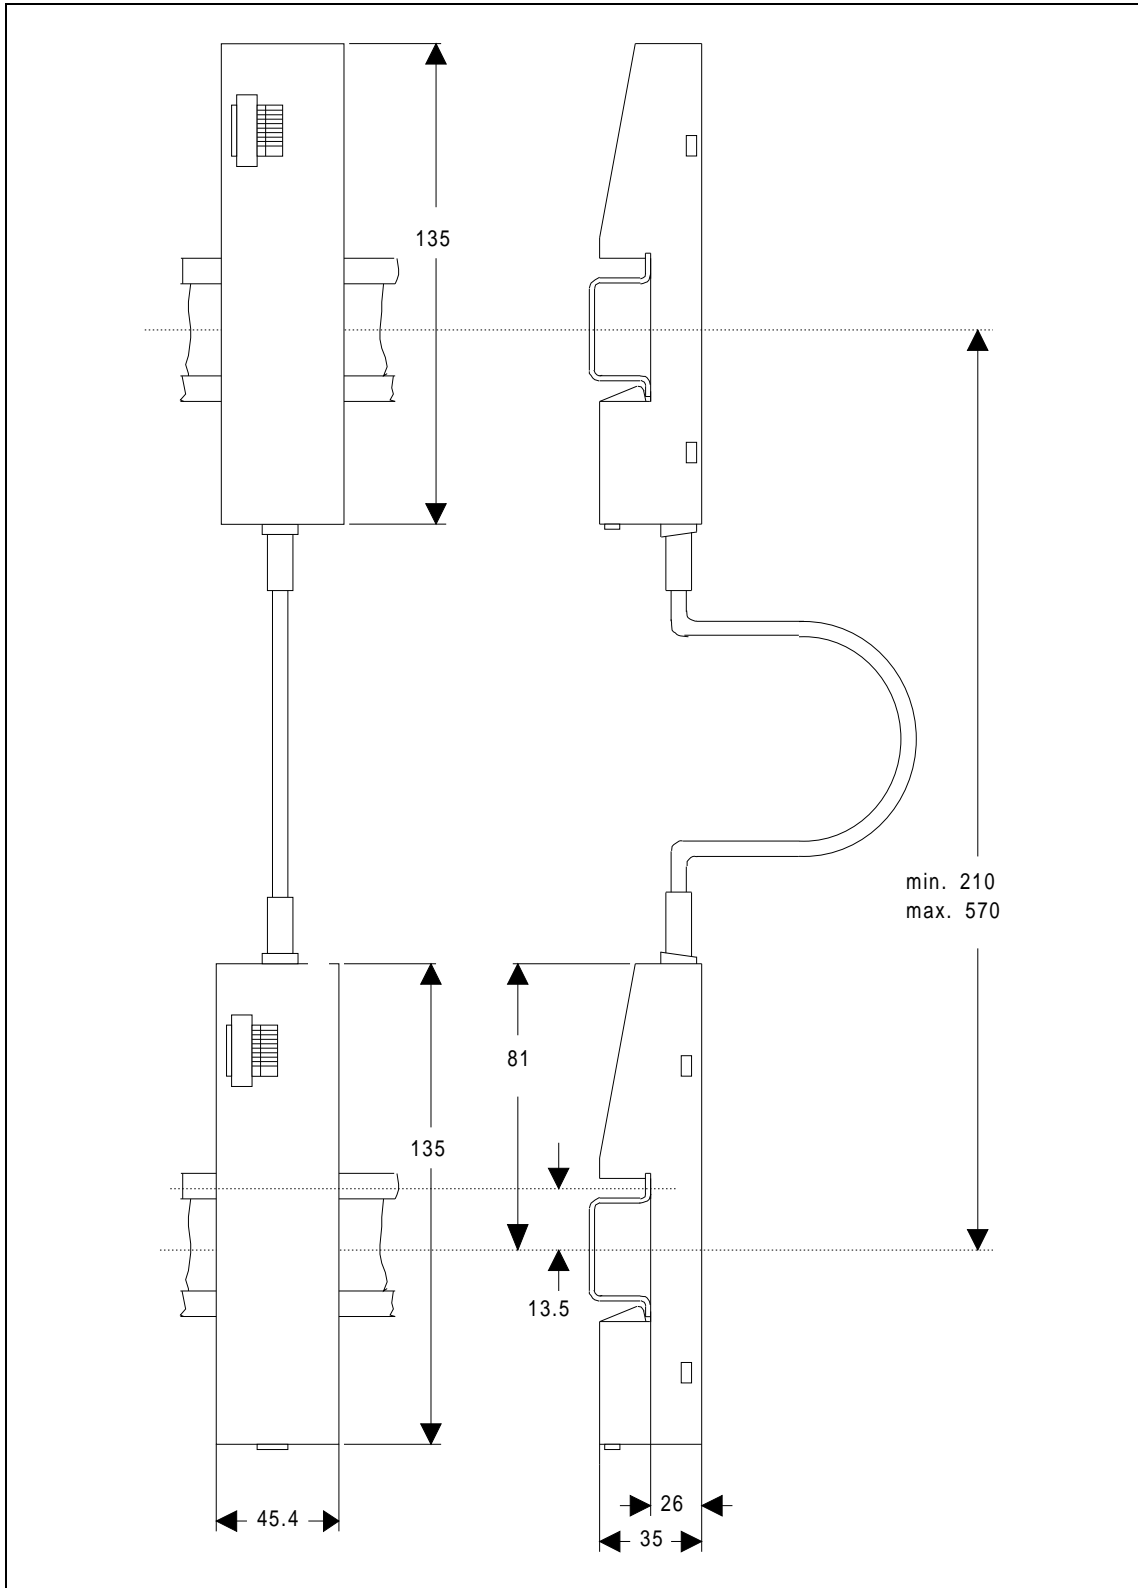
Dimension Drawing of the IM 315 Interface Module
